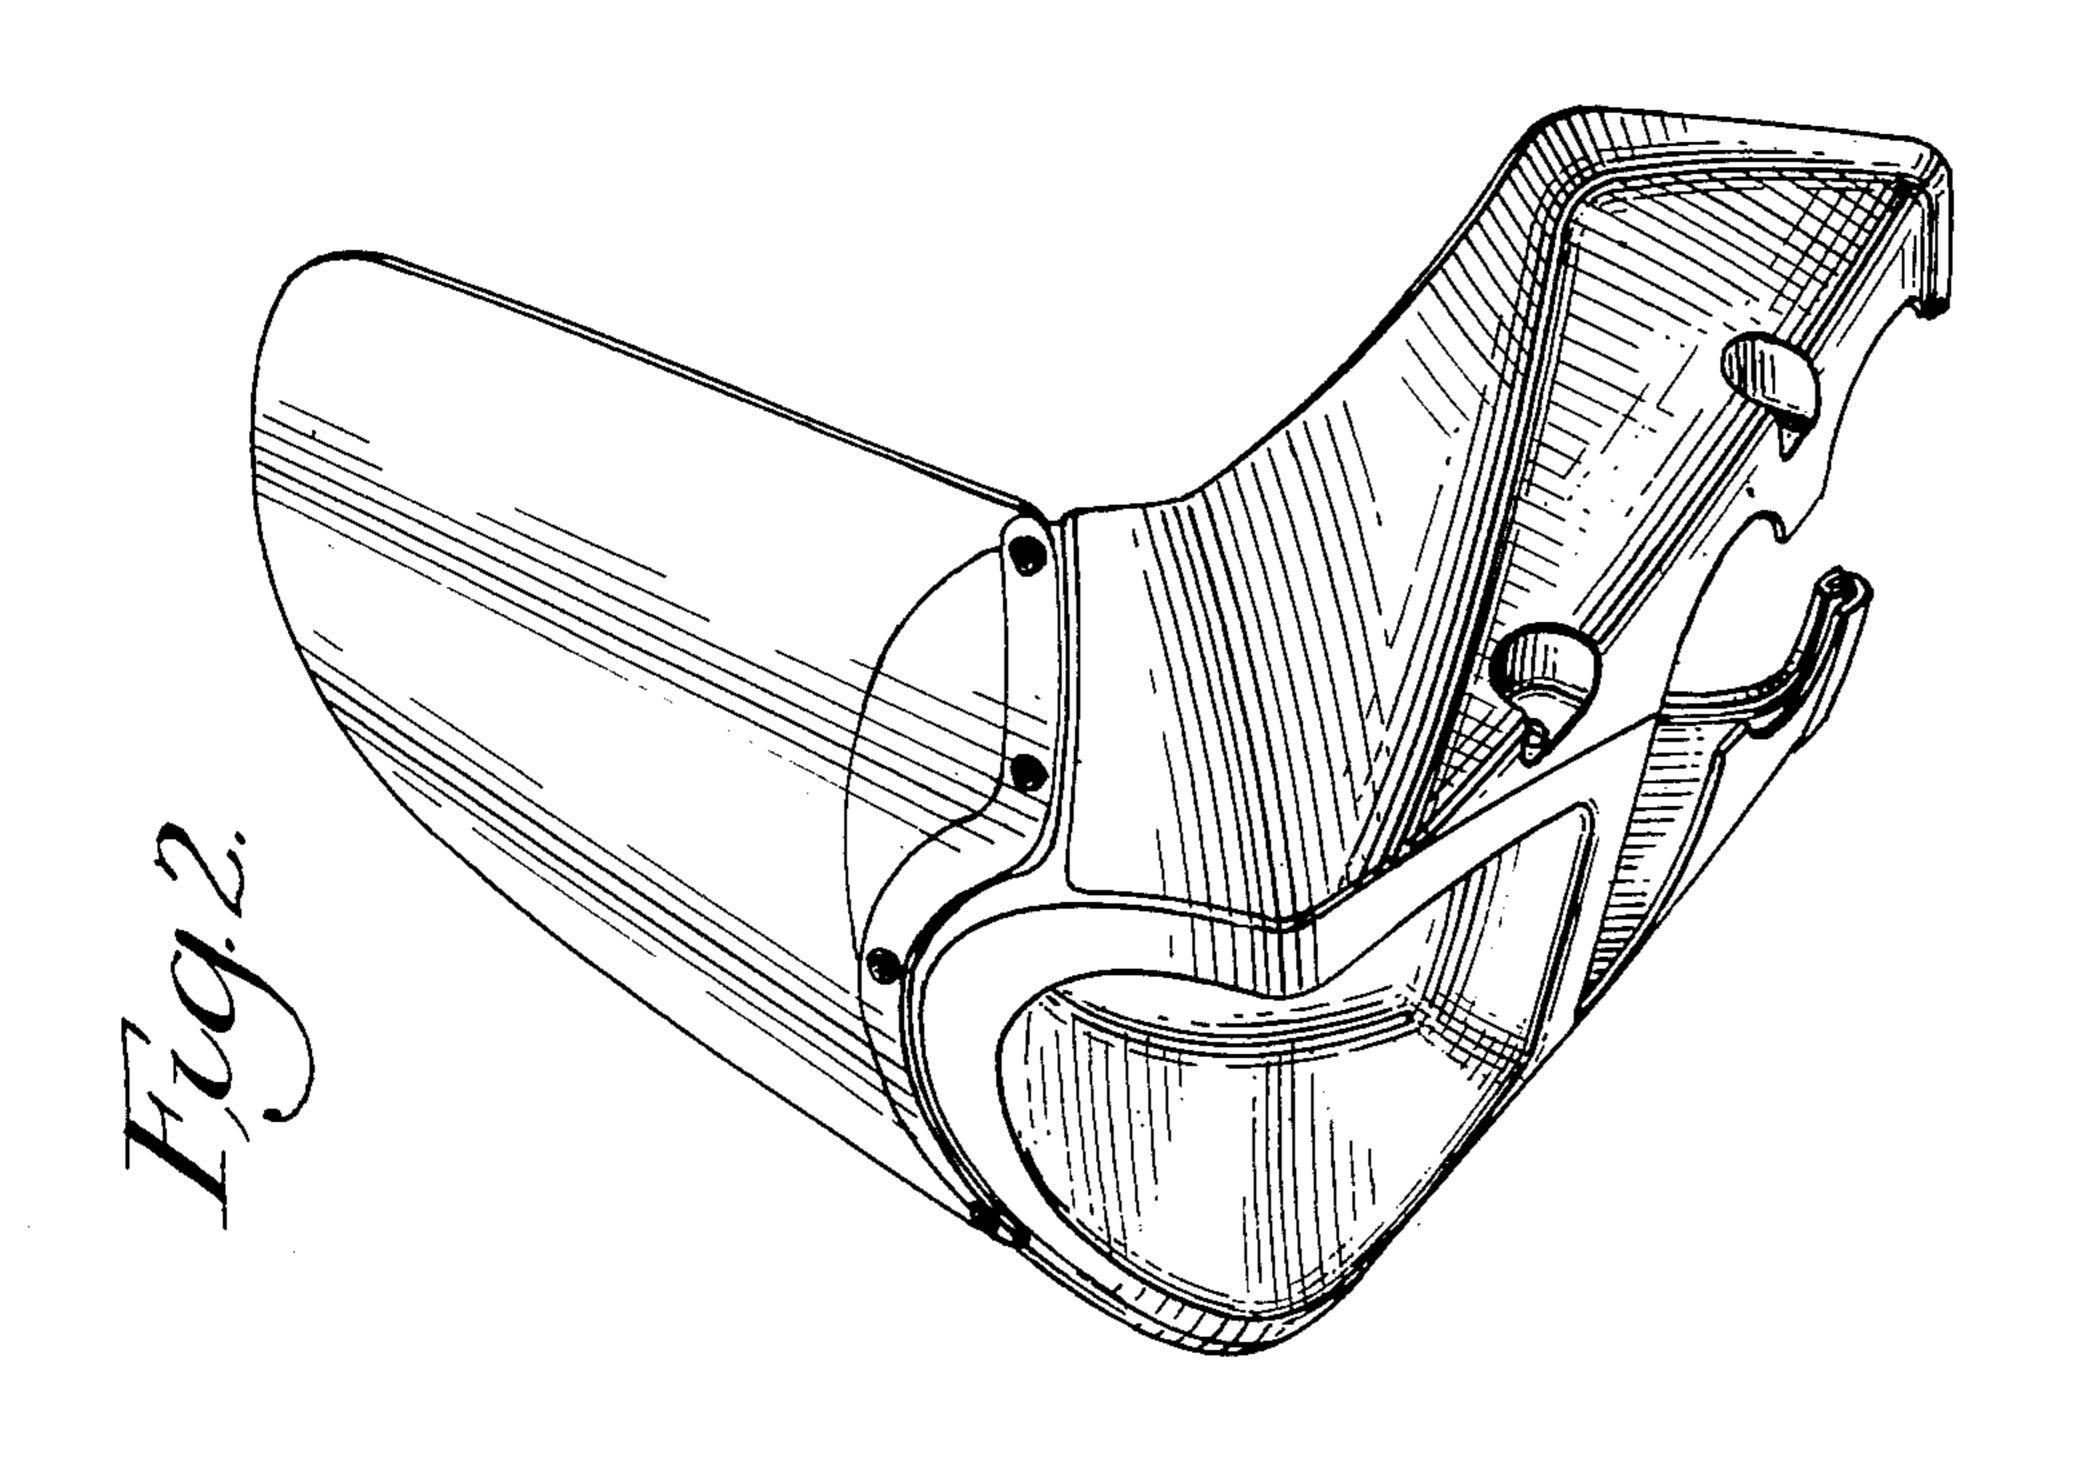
is a perspective view thereof from the left front; FIG. 3 is an enlarged front elevational view thereof;
